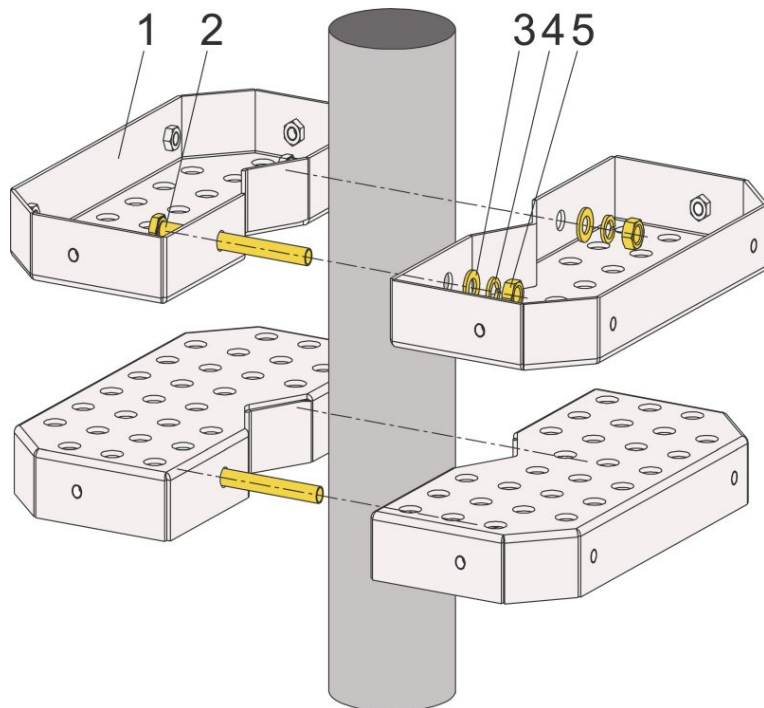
MOUNTING CLIP ASSEMBLIES
